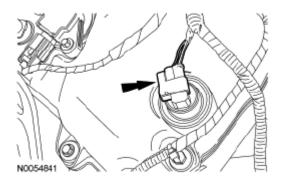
Locating RH Coil-On-Plug Electrical Connectors Courtesy of FORD MOTOR CO.
